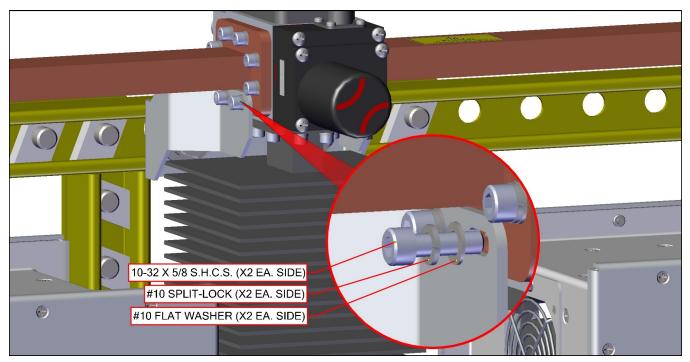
Switch Assembly Installation, C-Band (typical)
